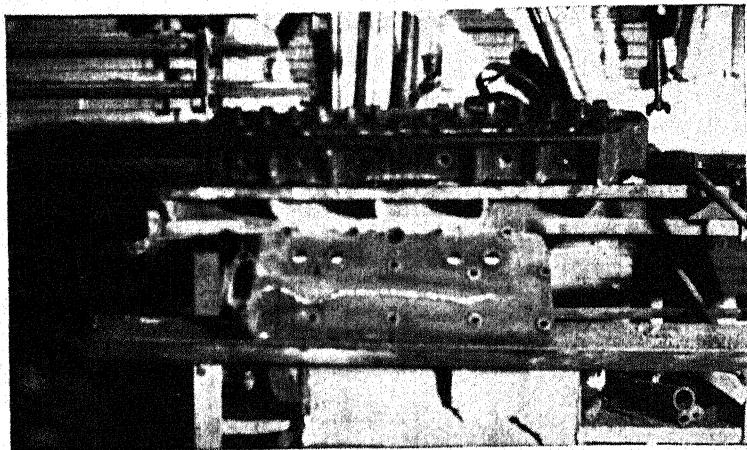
Crack in frozen cylinder head arc welded.
